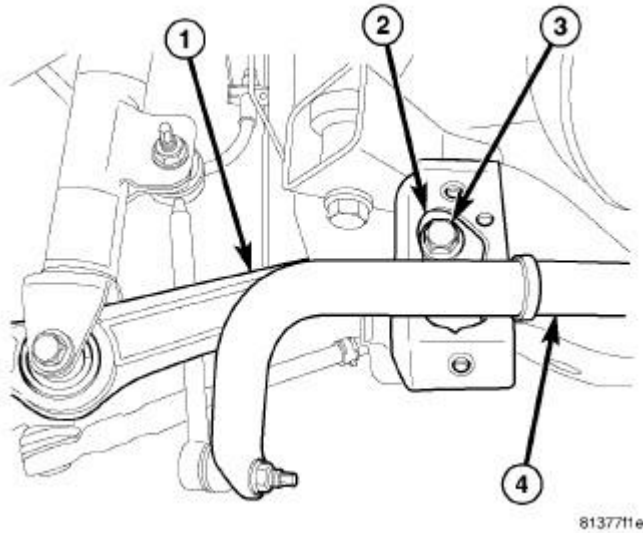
CONTROL ARM CRADLE BOLT HEAD
